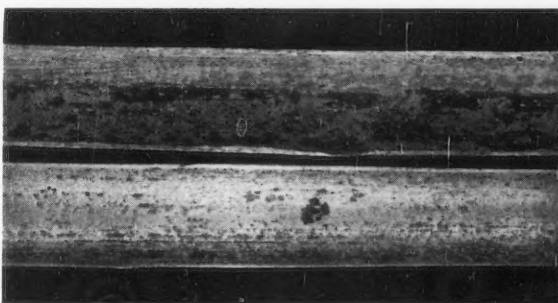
Deposit attack. Lower half of tube cleaned, showing many small pits and a hole. In upper half silt scale still partly present.
